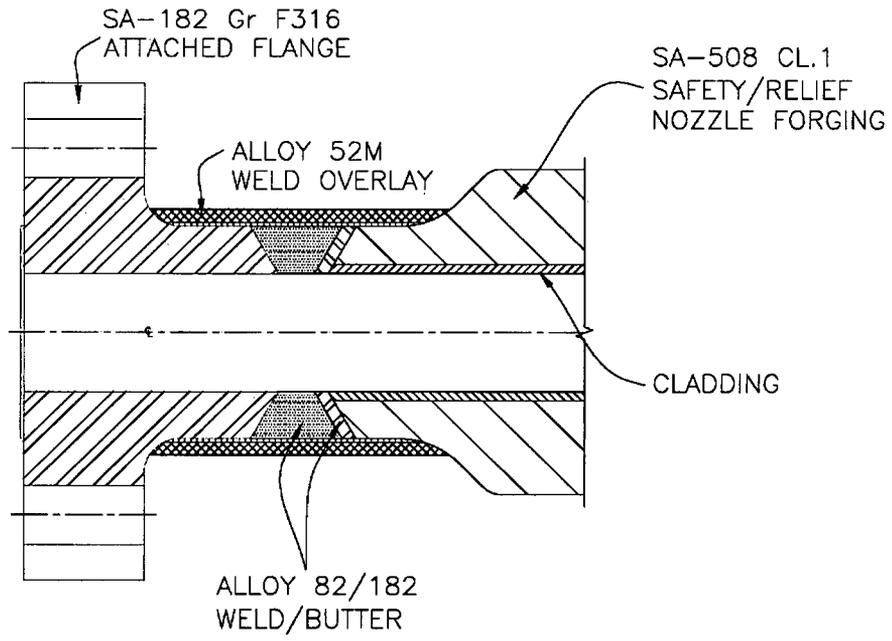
Pressurizer Safety/Relief Nozzle Weld Overlay (Typical)
